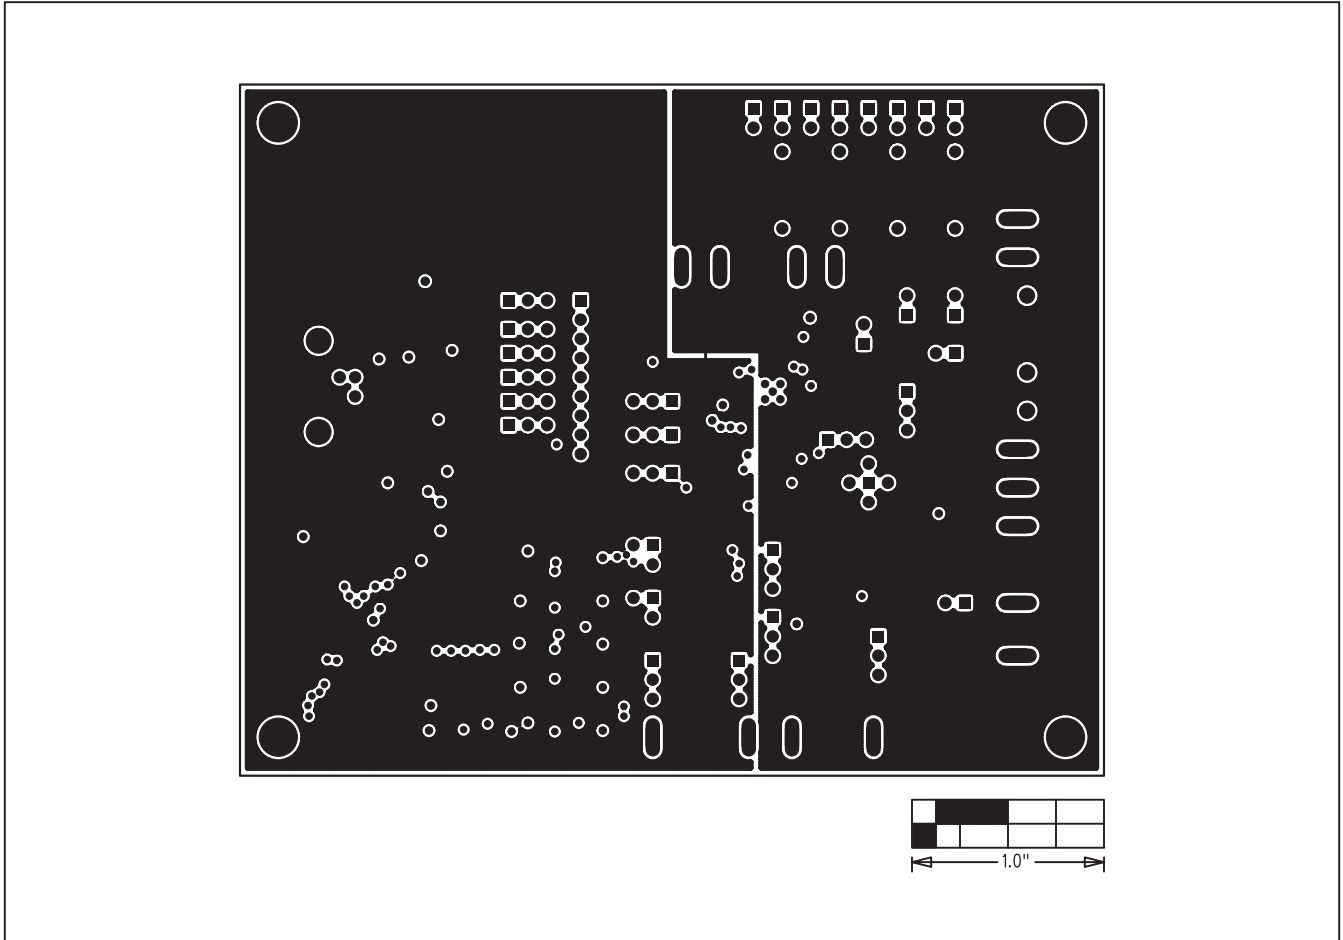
MAX15501 EV Kit PCB Layout—Layer 2
